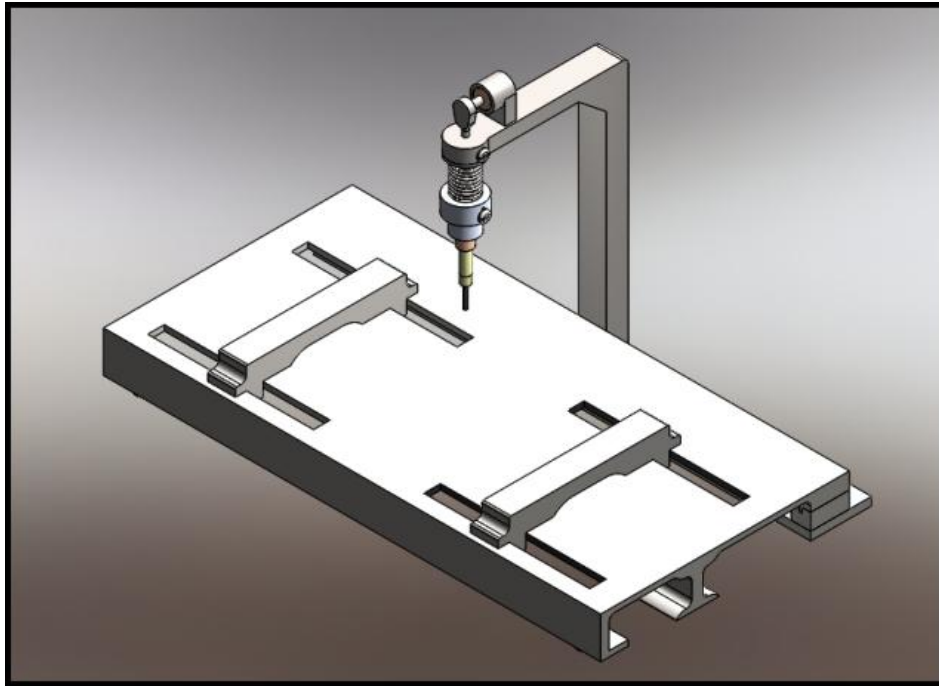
Trimetric view of the 3D model of valve lapping machine for internal combustion engines
